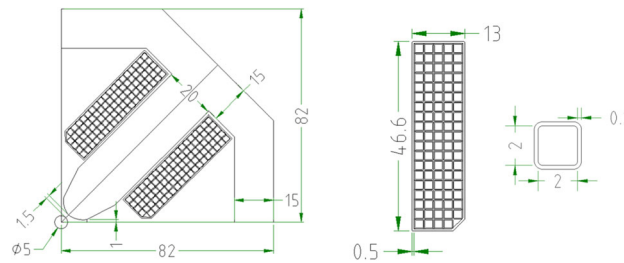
Left: FODO quadrupole magnet. Right: coil cross-section for the FODO quadrupoles. Dimensions in mm
